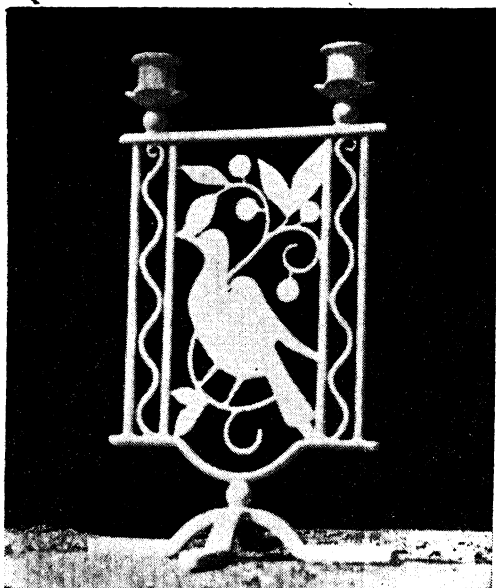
Candlestick, fabricated from mild steel by arc welding. 12" high. Contains more than 50 welds.
